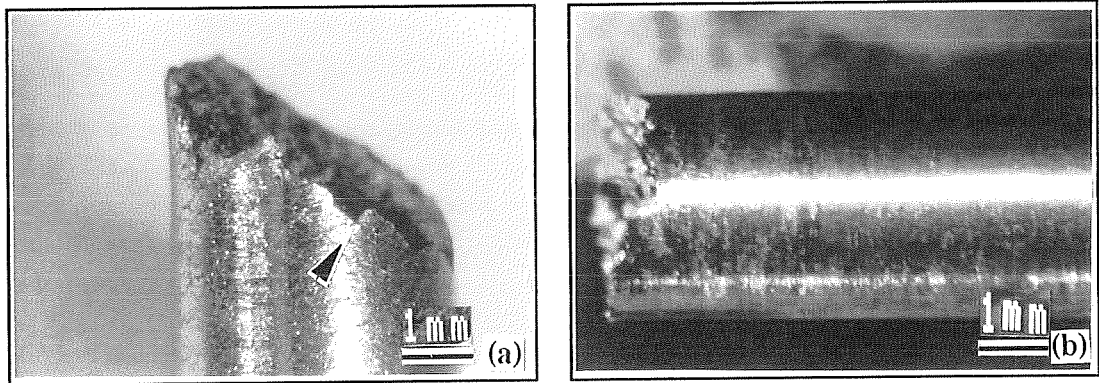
Optical Macrographs of the Fracture Surfaces of Composites, (a)-Extruded (ARSE), (b)-As-cast (AOX3)
